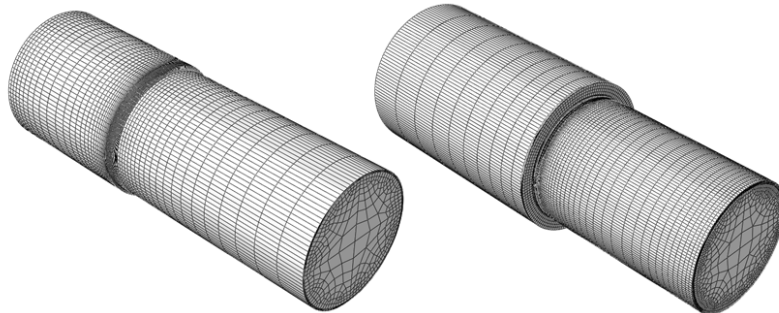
Meshed shafts of the two investigated shrink-fit geometries. Left: shaft shoulder fillet. Right: shaft shoulder with undercut.
